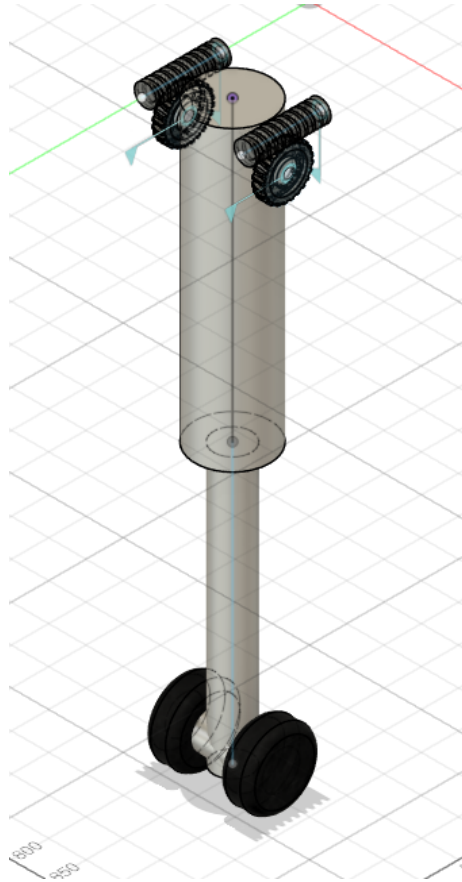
Landing Gear (with worm gear) Fully Deployed Isometric View
